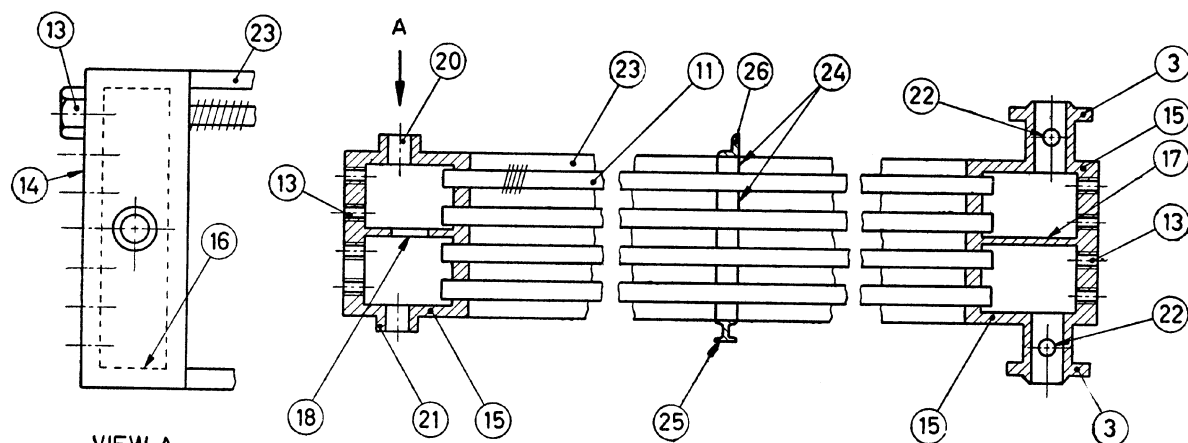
TYPICAL CONSTRUCTION OF A TUBE BUNDLE WITH PLUG HEADERS
